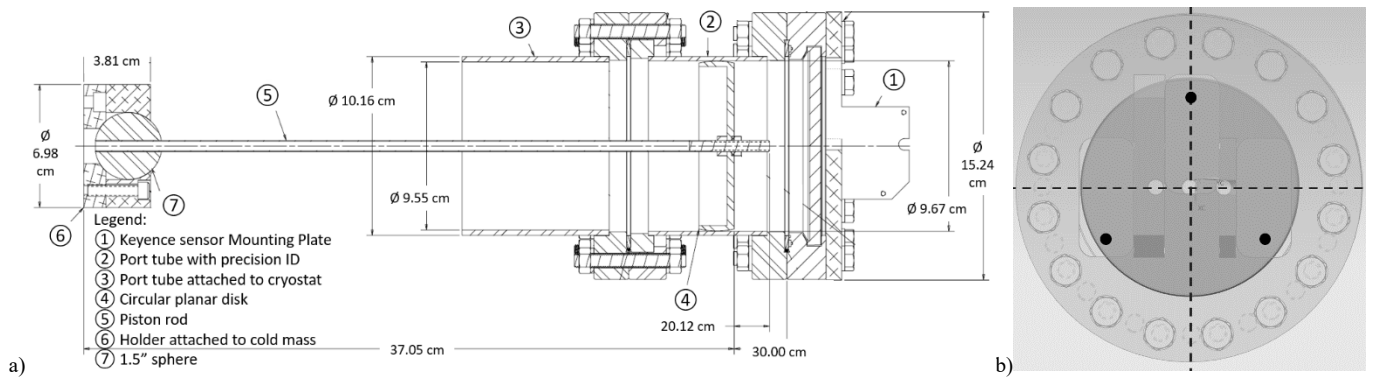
a) Mechanical Drawing of the Cold Mass Position Monitoring System with dimensions in inches. b) The survey locations of the Keyence laser on the circular planar disk, marked with a black circle. View is facing along the piston rod axis of Fig. 4 a).
